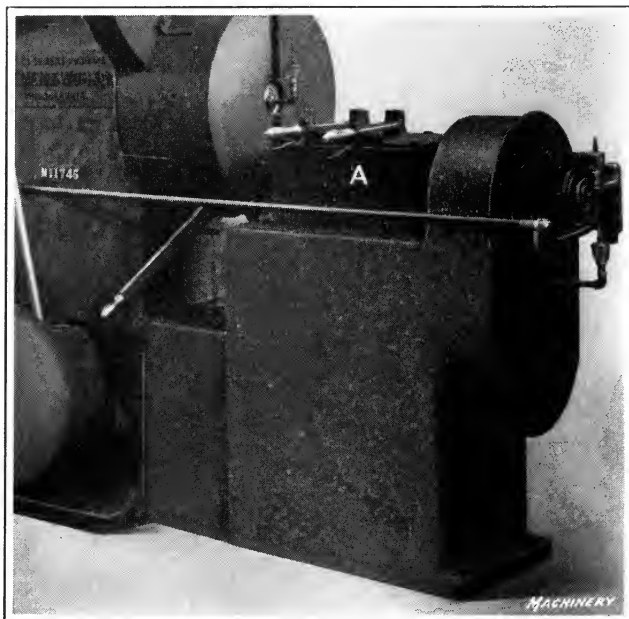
Large Slotter which is equipped with Same Speed-box as shown on Other Machines
